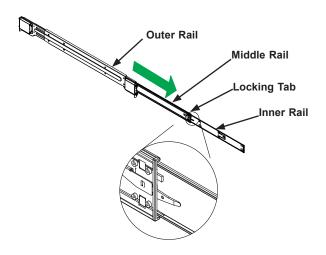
Identifying the Outer Rail, Middle Rail and Inner Rail (Left Rail Assembly Shown)
